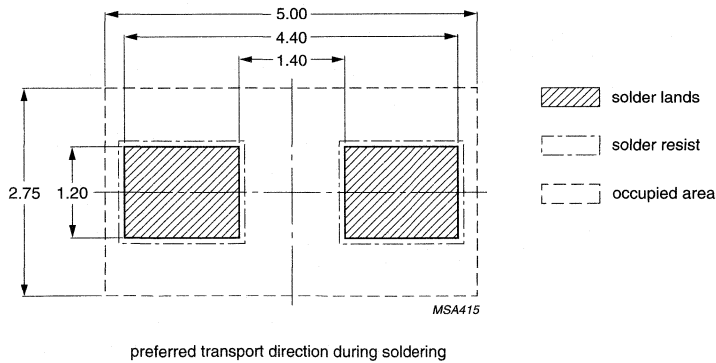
Wave soldering footprint for SOD323 (SC-76).
